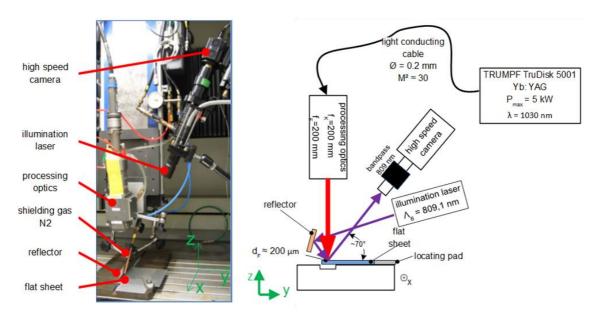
Experimental setup for flat sheet welding experiments.
